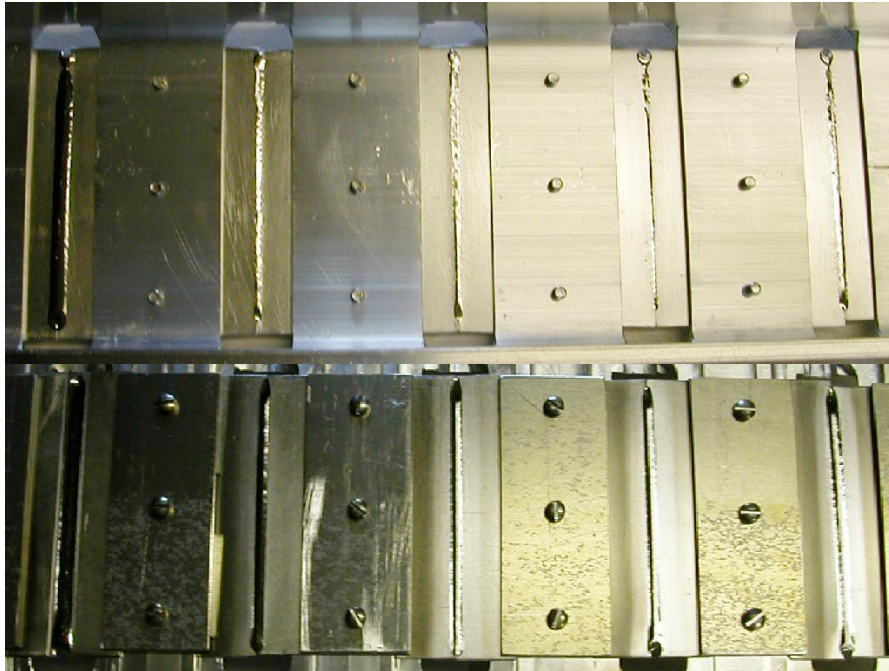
Welding test fixture top and bottom after welding. The samples plates are clamped between aluminum plates
